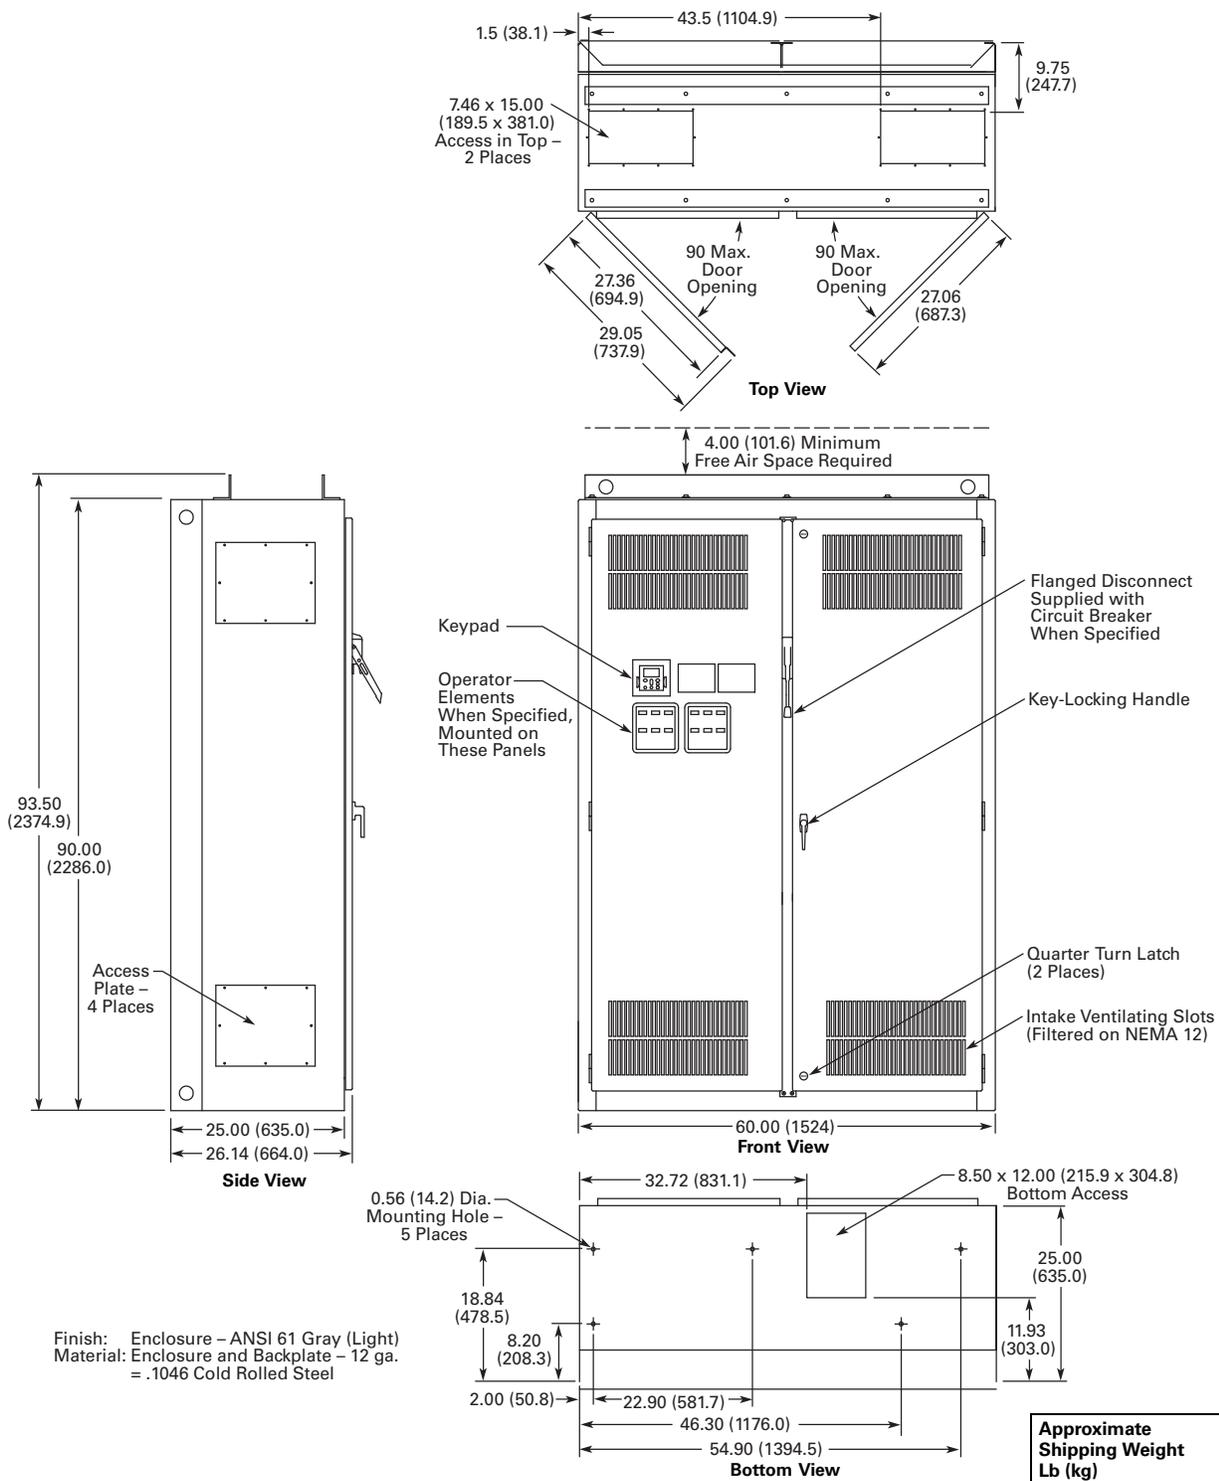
Enclosure Size 9—Approximate Dimensions in Inches (mm)
